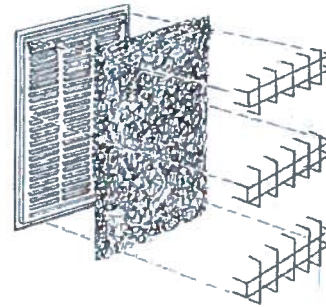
STANDARD EXCELSIOR COOLER PAD
